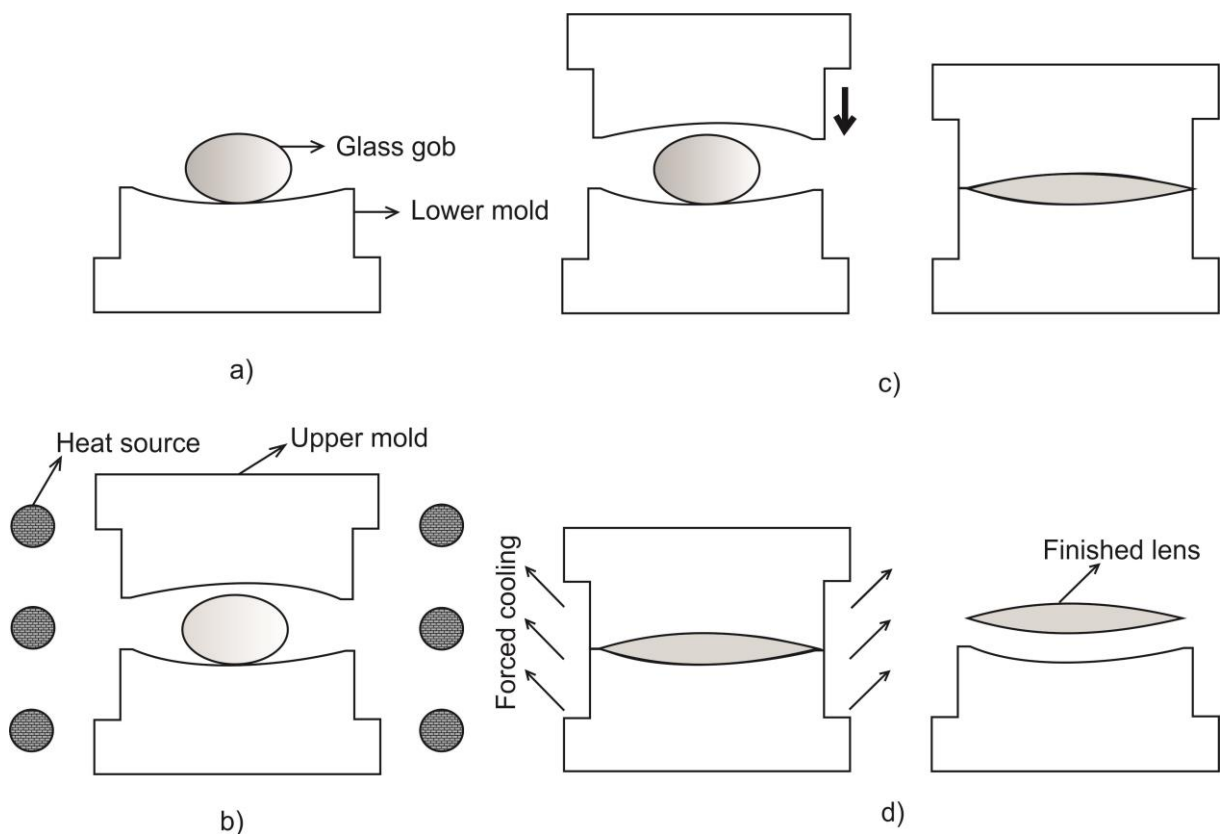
Placing of raw glass gob/ blank material on the lower mold, (b) Heating of the glass and mold assembly to the molding temperature, (c) Pressing (molding) of the glass material between the mold halves and (d) Forced cooling of the lens and mold assembly to near room temperature and lens release
